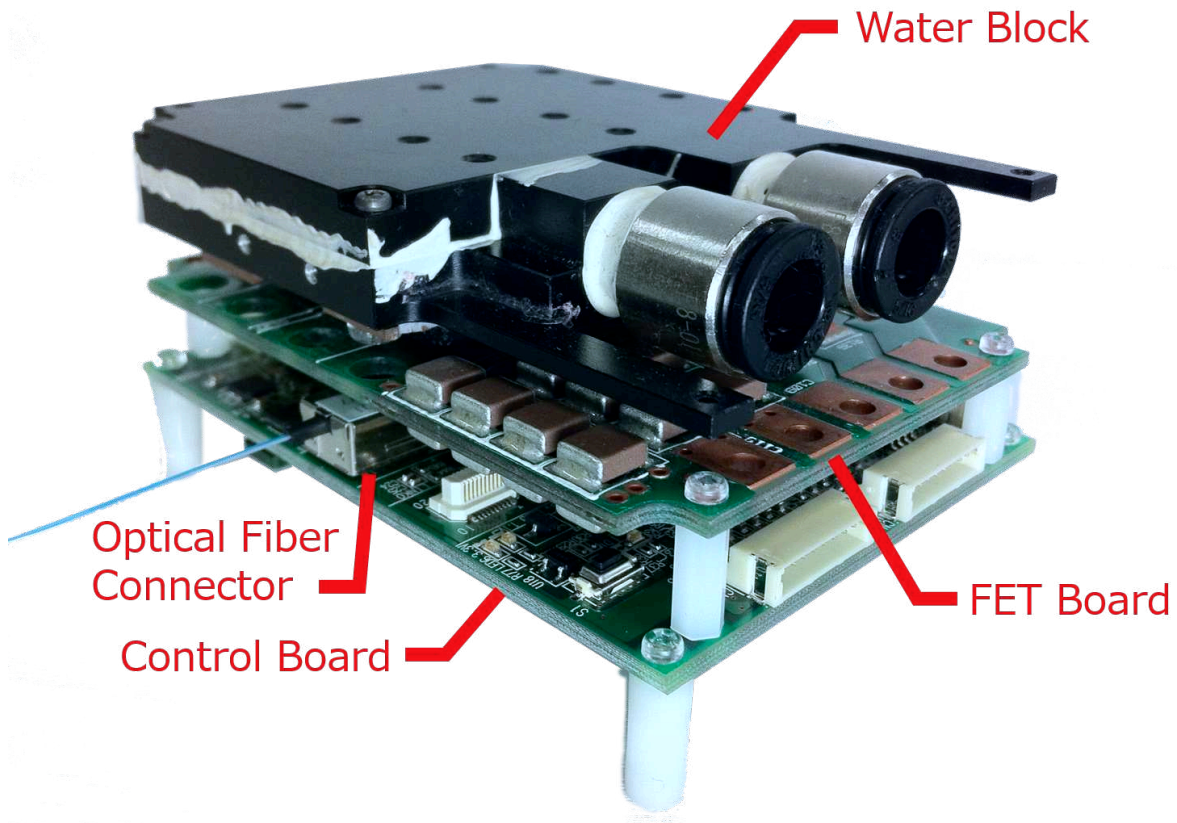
RMTP02D Motor Driver Board assembled with FET board and water block module.
